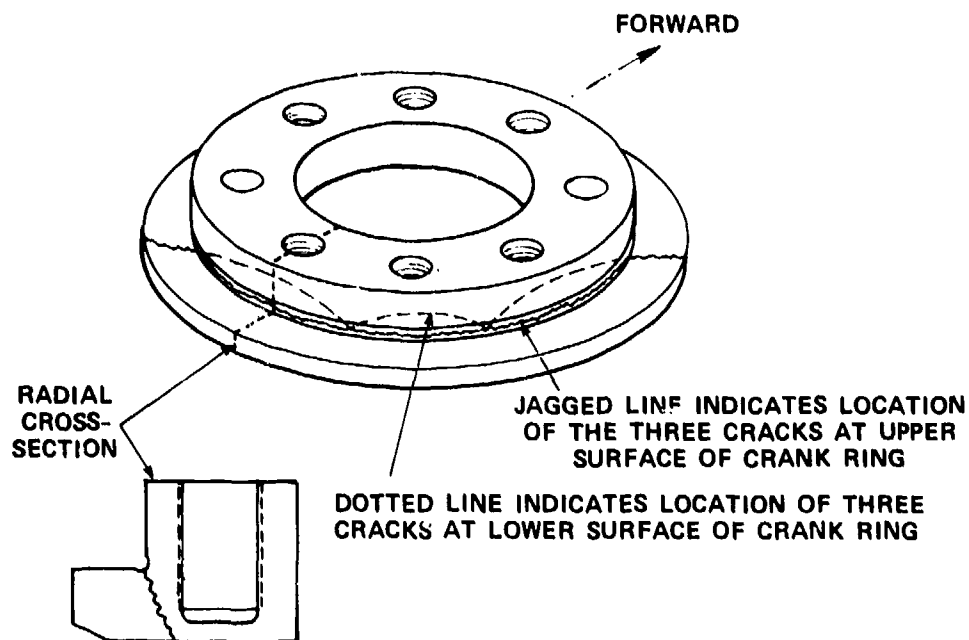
Fatigue Failure in Steel Crank Ring of High Toughness
